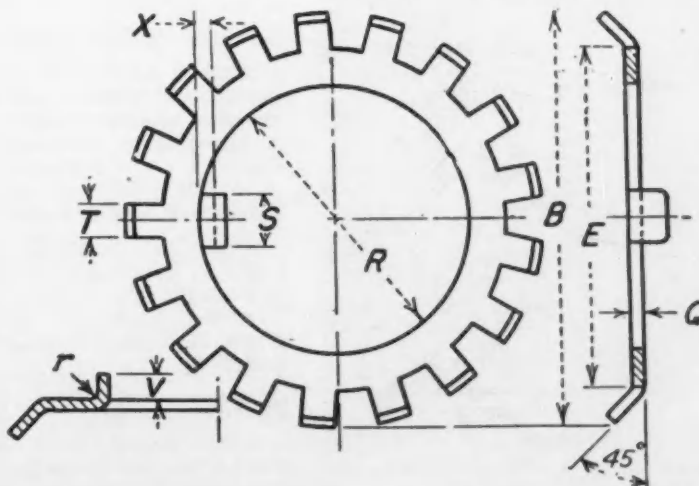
Configuration of the ball and roller bearing lock nut specified in the revised SAE Standard
